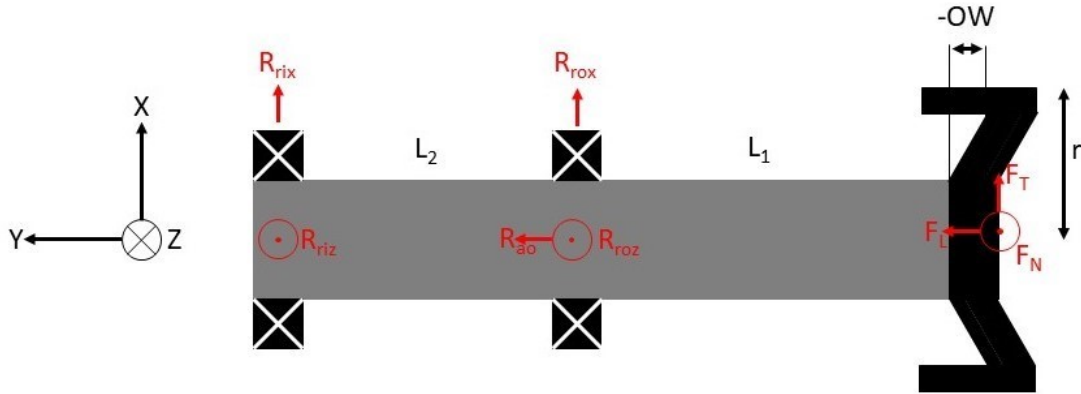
Free body diagram of the bearing assembly in the XY-plane
